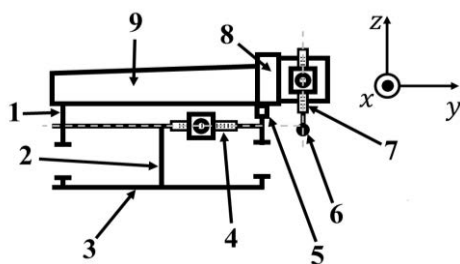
The vertical plane of the NanoCMM: (1) rod, (2) stress frame, (3) holder with preload bearings, (4) y-scale, (5) cross beam on rods, (6) probe system, (7) z-scale, (8) mounting face, (9) strip-on-edge plate
